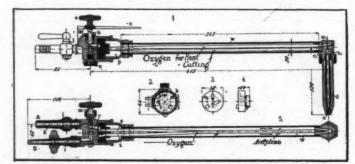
Oxy-acetylene metal-cutting tool-dimensions in millimeters
